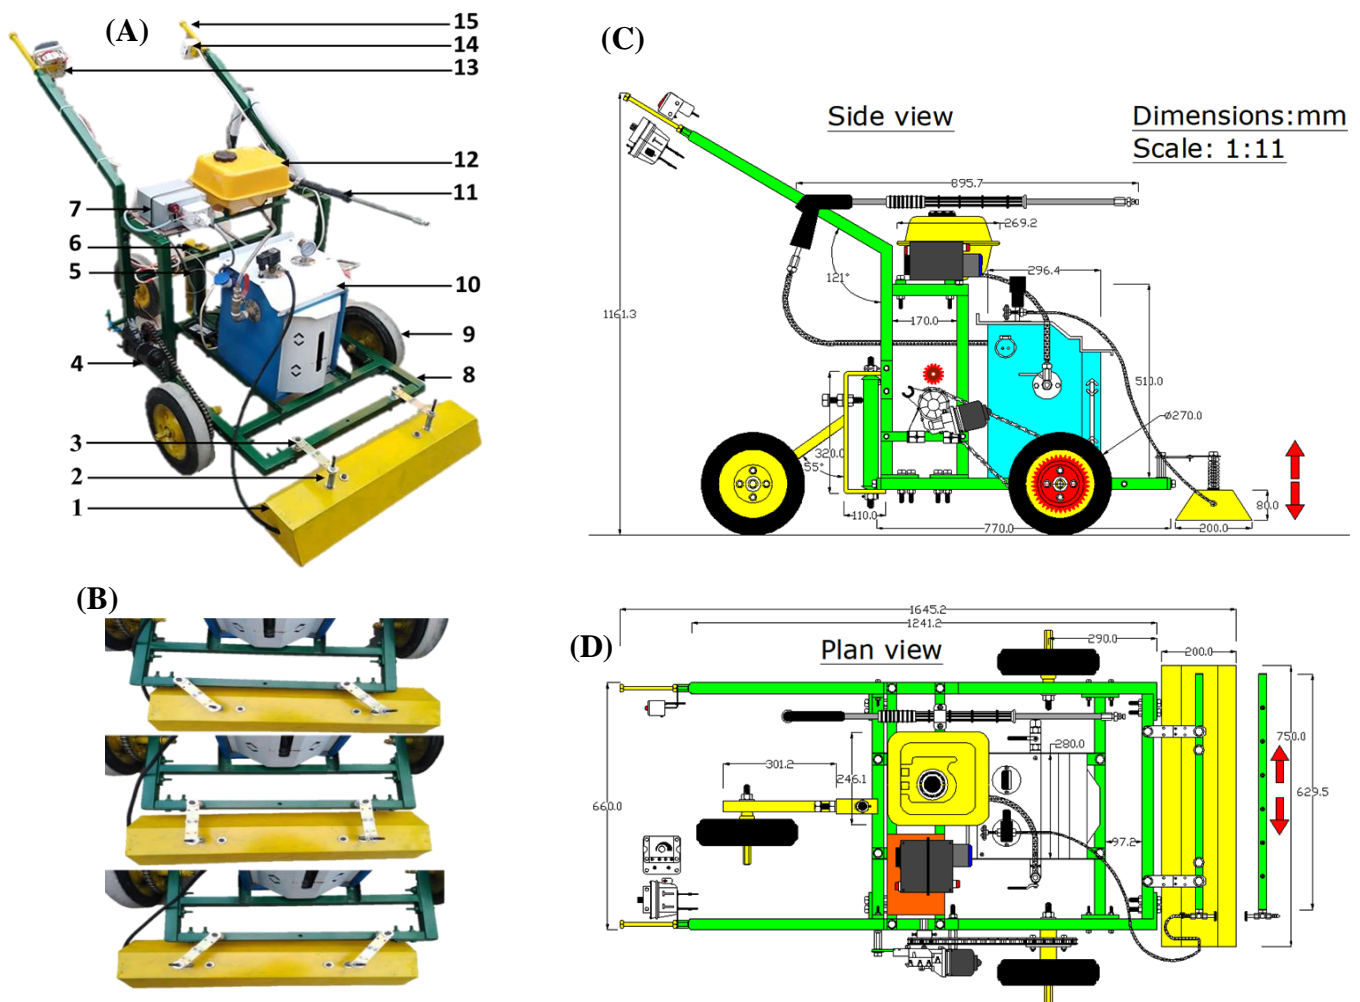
(A) The self-propelled steam soil sterilizer (1-steam distributor; 2-spring holder; 3-rotary hinges; 4-DC transmission motor; 5-thermocouple sensor; 6-rear wheel spindle; 7-thermocontroller; 8-frame; 9-front wheels; 10-steam generator unit; 11-steam gun; 12-water tank; 13-control box; 14-steam microswitch; 15-handle), (B) steam distributor positions, (C) Side view of the 2D geometric of a soil steam sterilizer device and (D) plan view of the 2D geometric of a soil steam sterilizer device.
